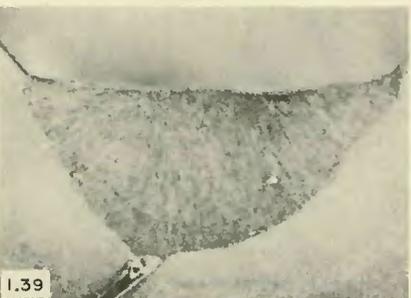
Cross-section of weld made in static air (1.39% Al in weld)
